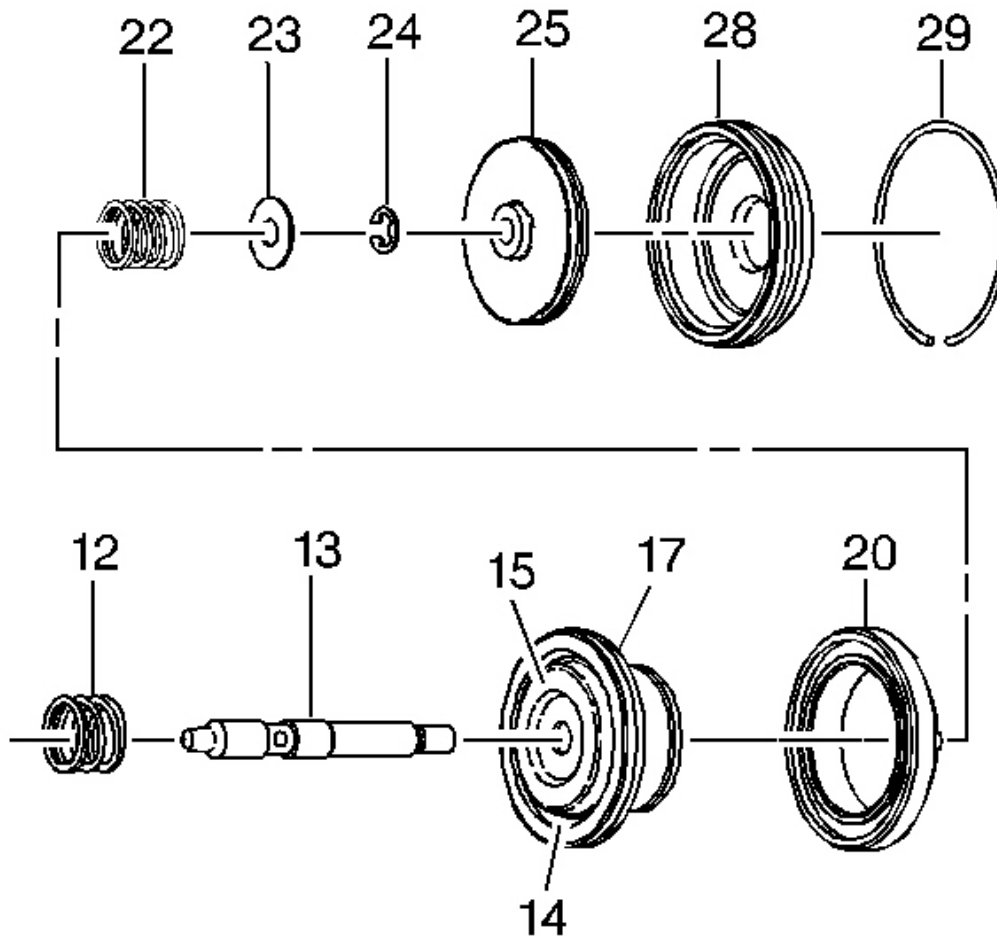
Illustrating Assembly Order Of 2-4 servo components
